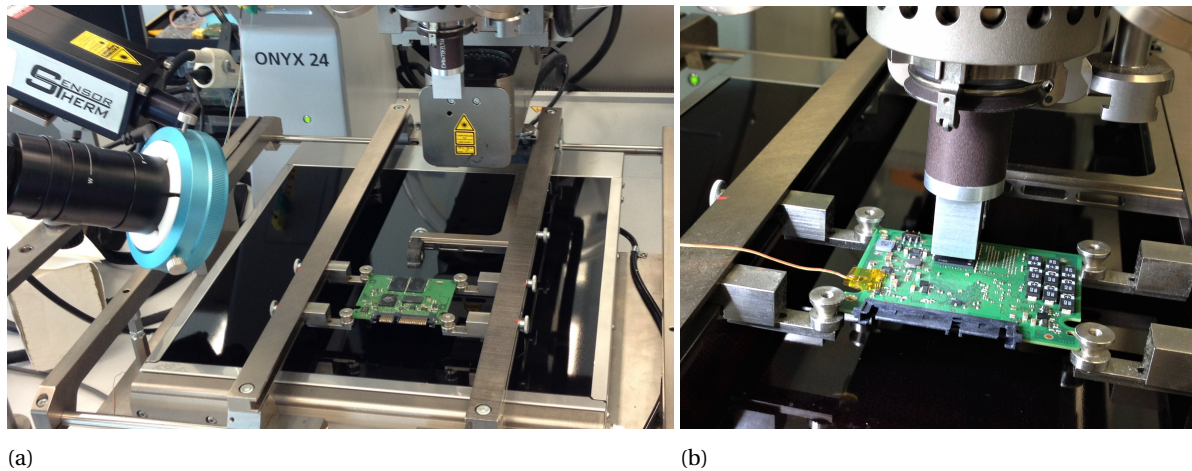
Unsoldering of the BGA packages using the ZEVAC Onyx24 machine. (a) An optical and thermal camera track the progress. (b) The hot airgun is fitted with a mouth piece to localize the heating.
